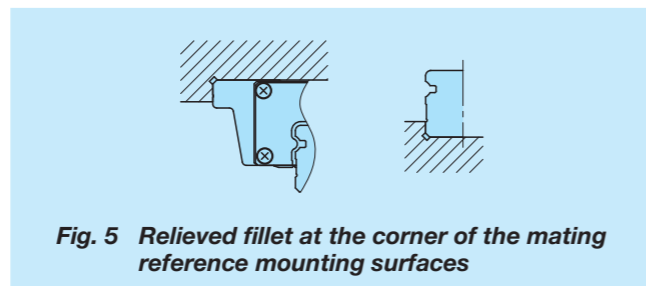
Relieved fillet at the corner of the mating reference mounting surfaces
